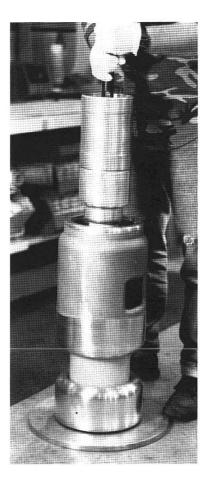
Lifting the moving contact assembly out of the interrupter tube
